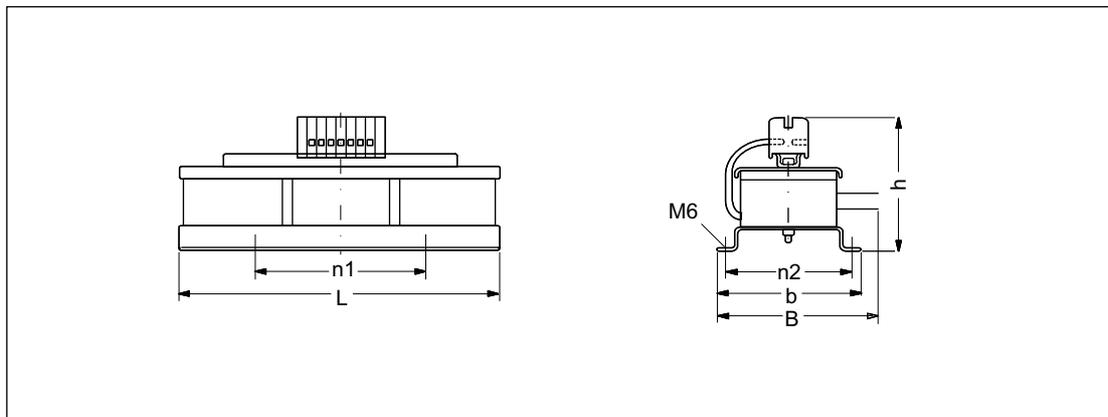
Dimension drawing of HF line reactor for Active Line Modules up to 55 kW
